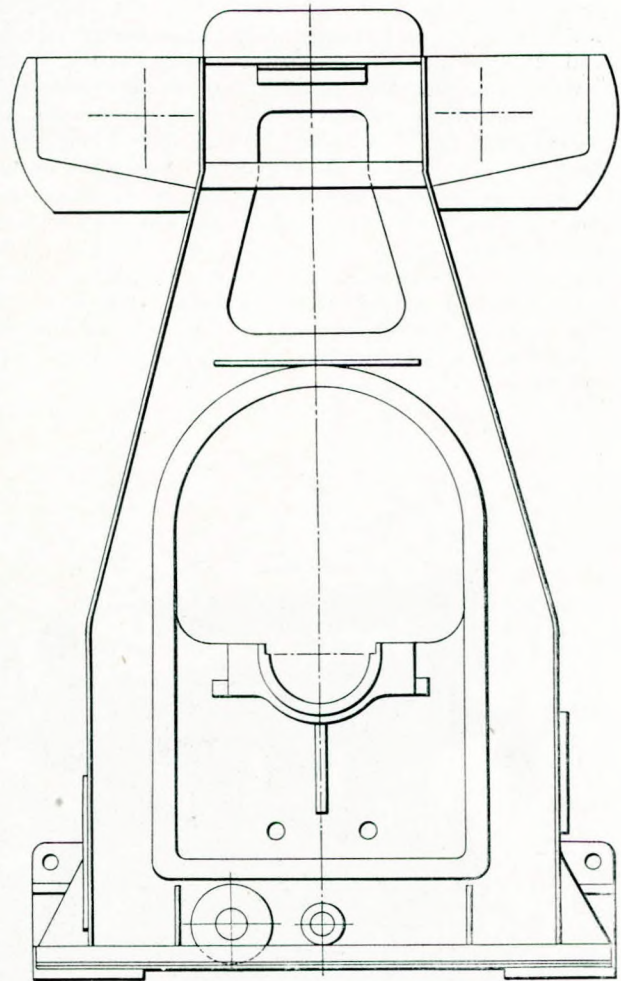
End elevation of 75-b.h.p. auxiliary engine.
